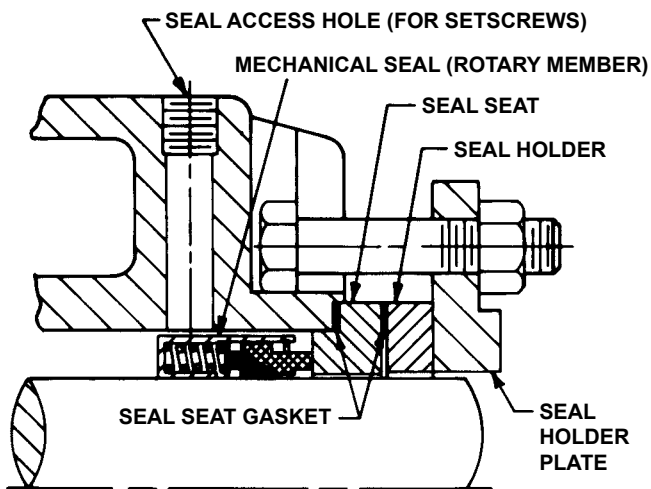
PTFE FITTED MECHANICAL SEAL
